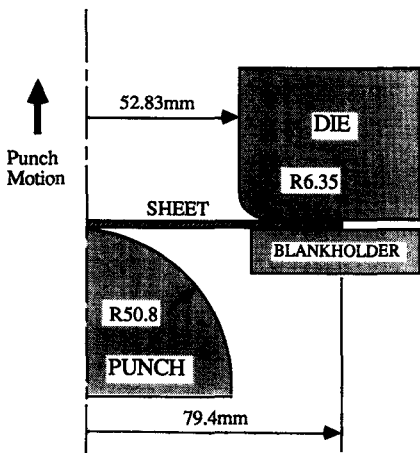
Tooling geometry for hemispherical punch drawing operation
